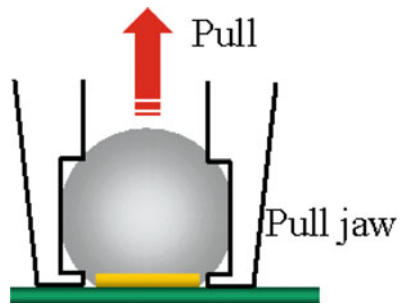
shows the apparatus for high-impact ball pull testing. A Dage 4000 bond tester was used in this test.
